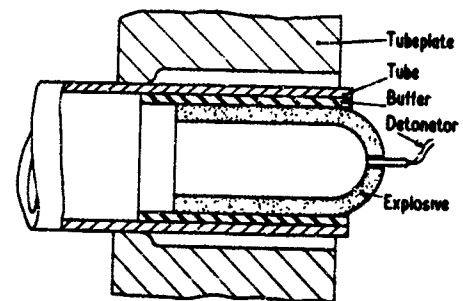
Schematic for Explosion Welding Tube to Tubeplate Using Subsonic Detonation Rate Explosive<sup>(4)</sup>.
